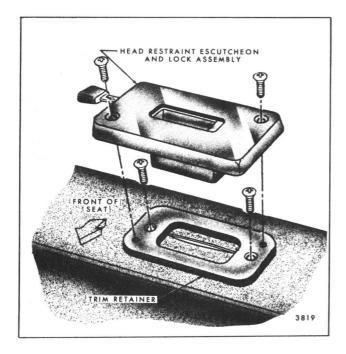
Front Seat Back Head Restraint Retainer, Lock and Escutcheon - Full Width, 60-40, 50-50 and 40-40 Seats
